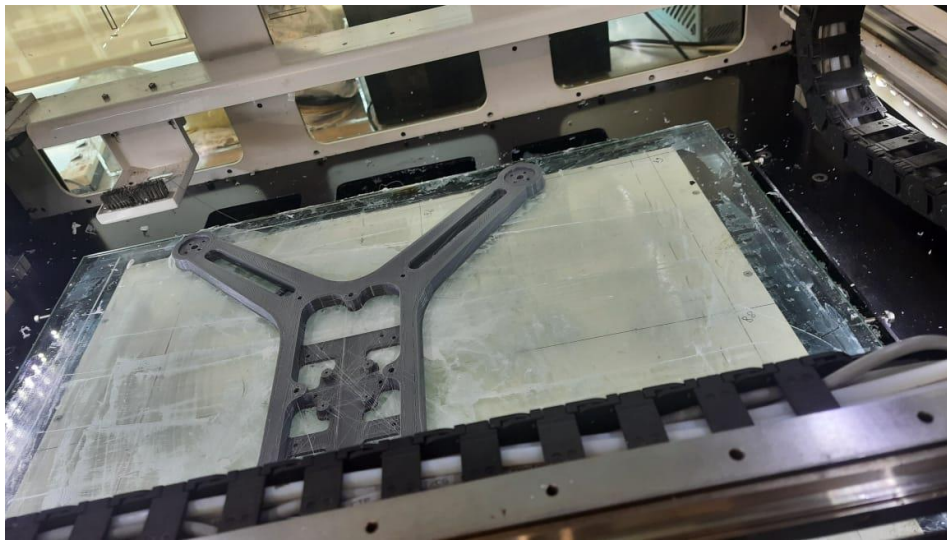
Frame 2 (30% infill) immediately following print completion, showing surface finish and dimensional accuracy.
